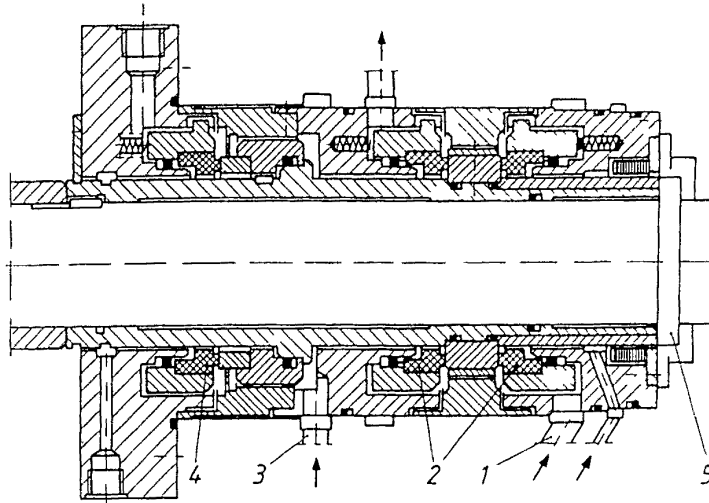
35 High pressure mechanical seal (GRASSEL/BURGANN) 1 blocking circuit I 2 mechanical seals arranged back to back 3 blocking circuit II 4 mechanical seal 5 shaft
